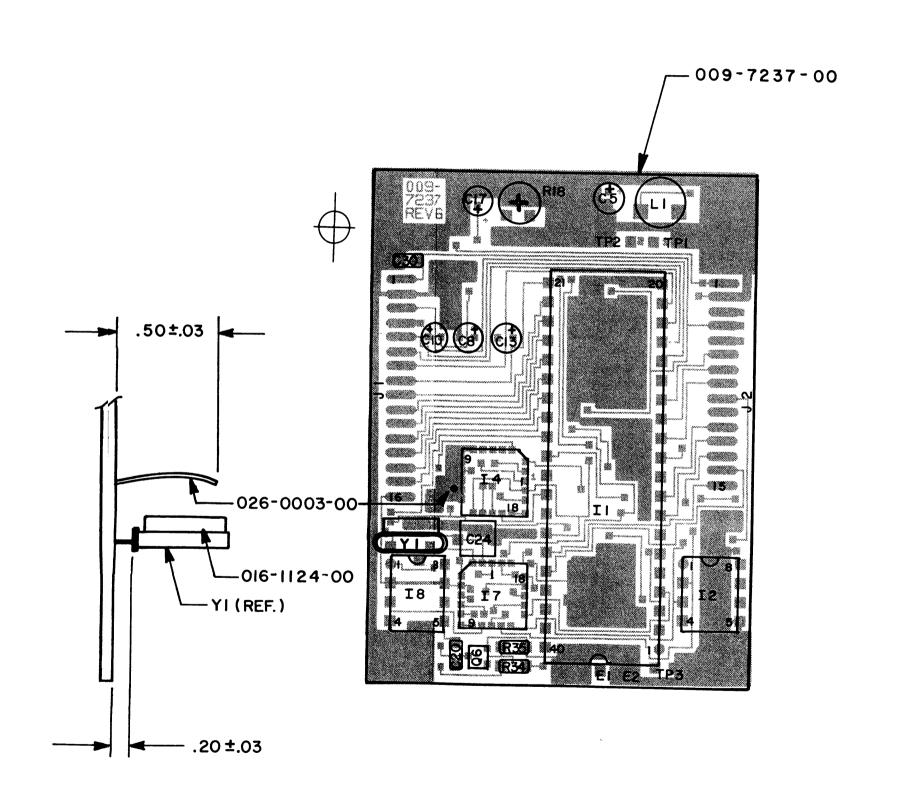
VOR/MICROPROCESSOR BOARD ASSEMBLY (Dwg No 300-7237-00 R-0)
